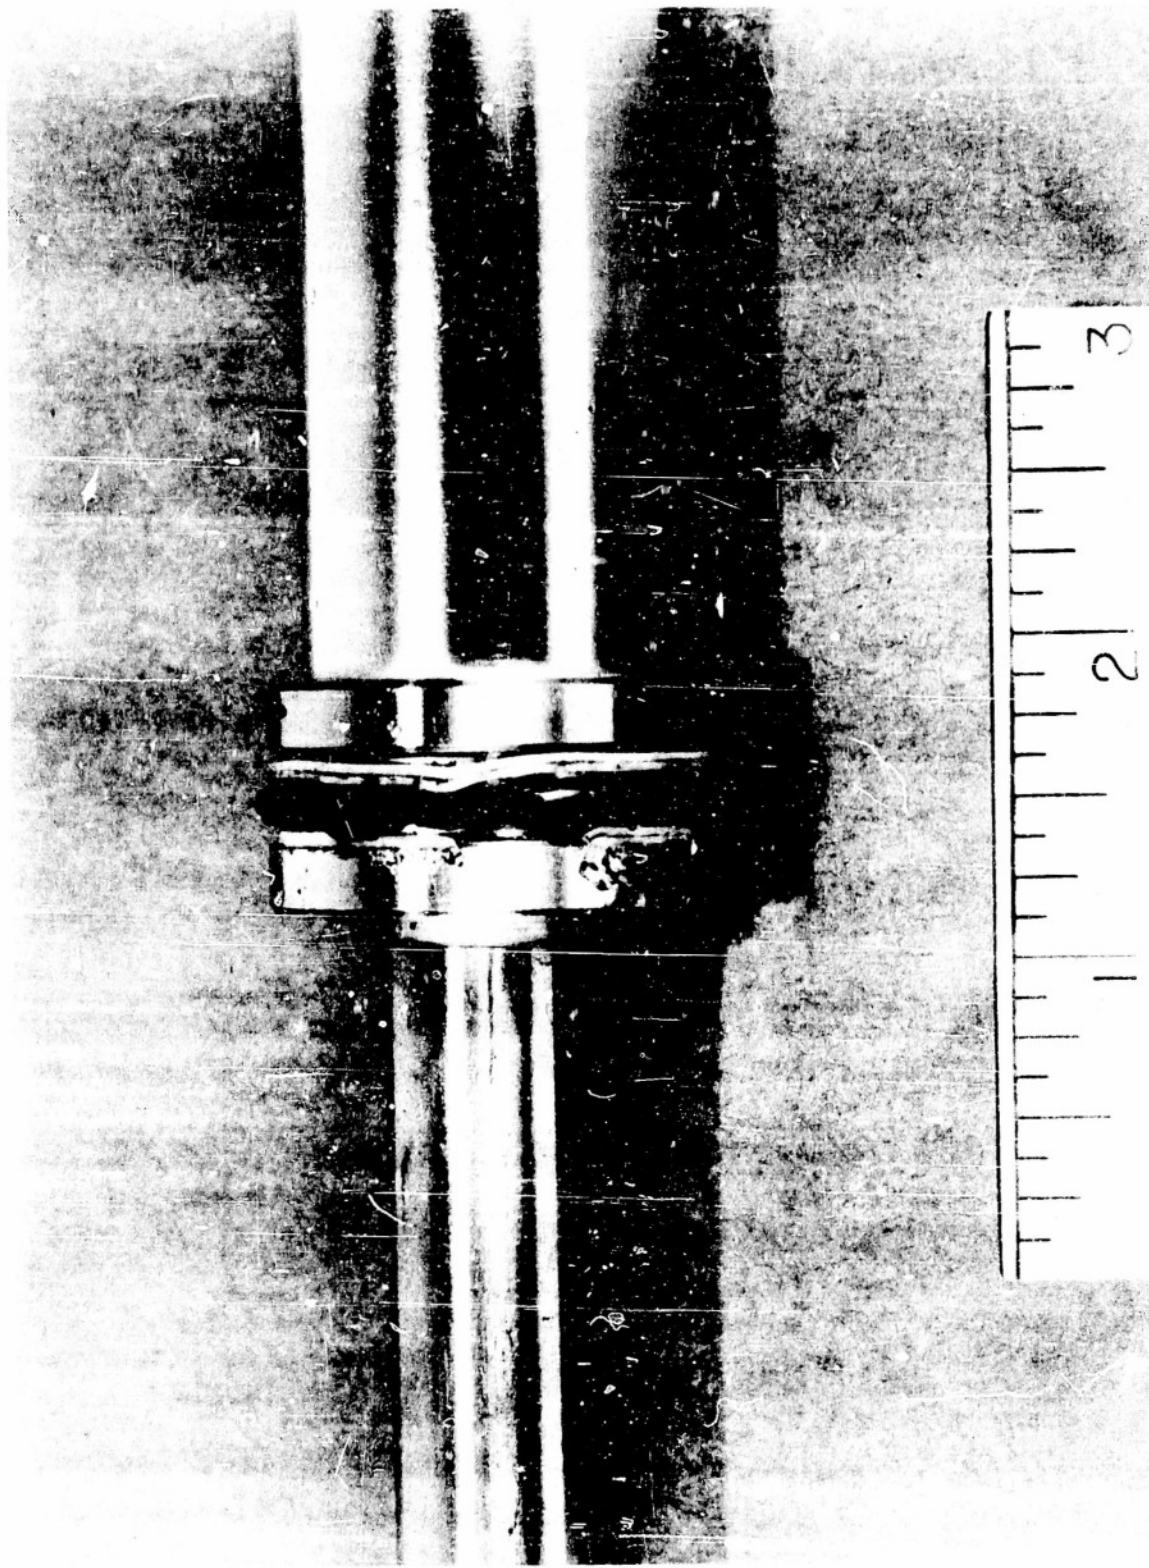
Figure II - Seal failure caused by breaking up of Teflon back-up ring. Neoprene "W" O-ring tested in OS-45-1 at 3500psi. Failed after 61,000 cycles at 2 cps over 1-1/2" stroke under 3000 psi.
